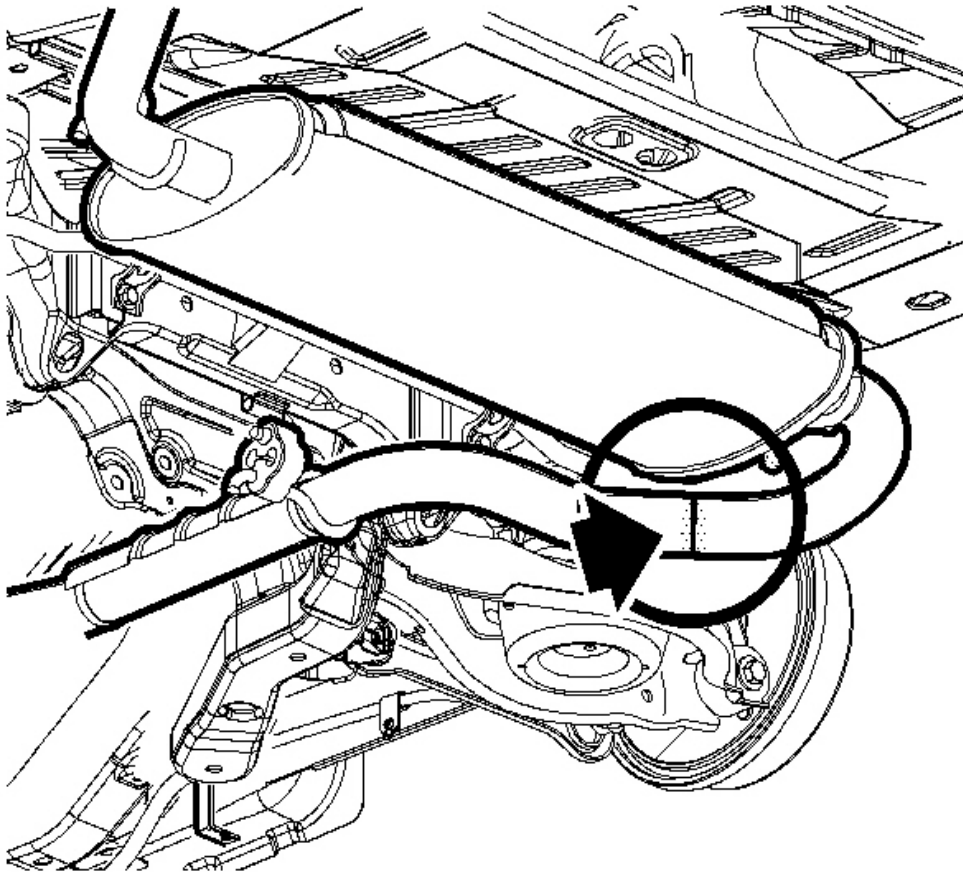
Positioning Service Intermediate Pipe & Resonator Assembly
